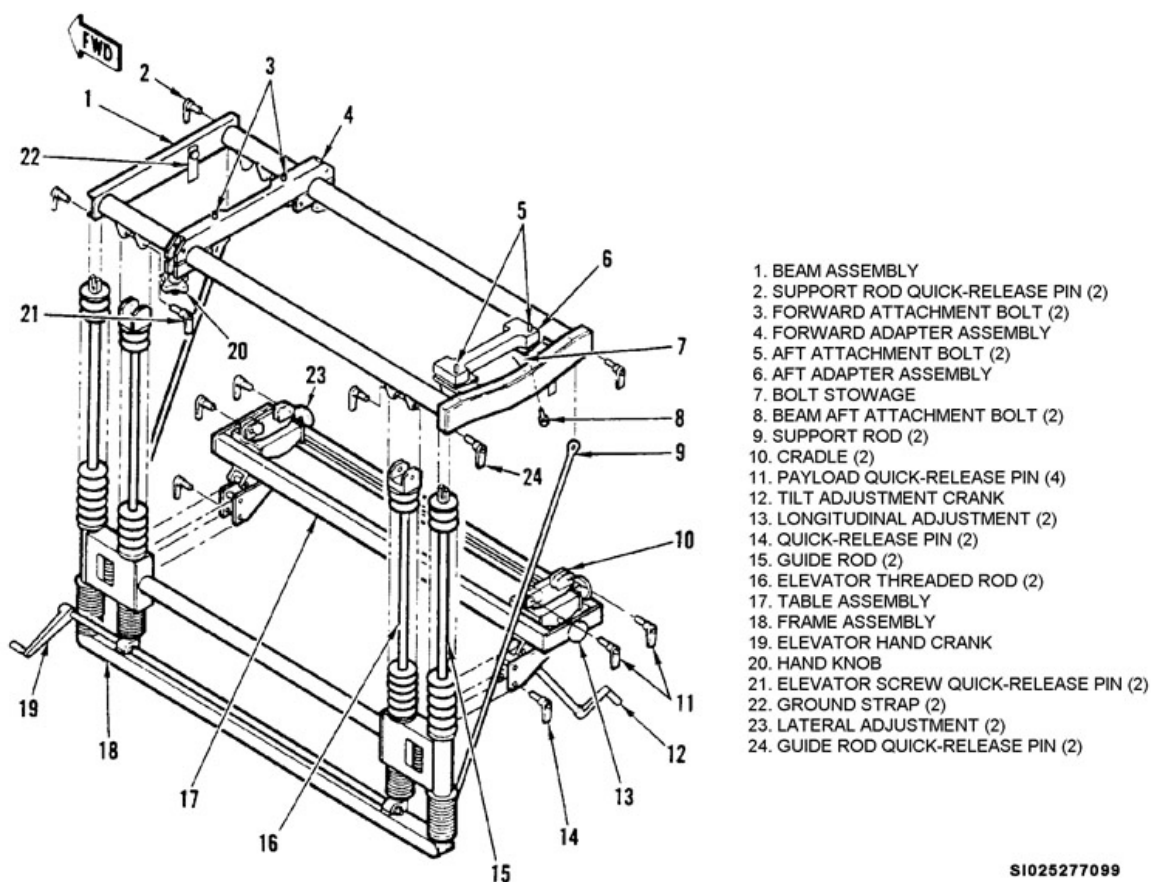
GSU-283/E warhead installation-removal positioner.
